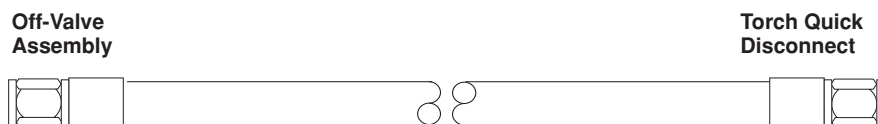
Shield Gas Hose Assembly, 3/16 Inch Gray RH "A"
